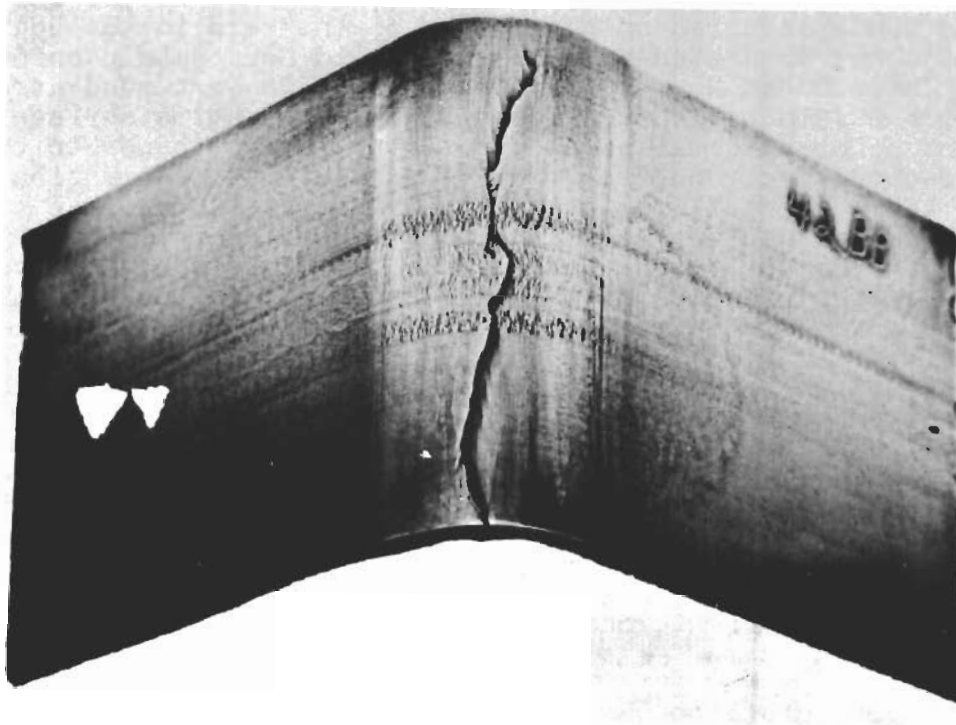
LONGITUDINAL-WELD BEND TEST SPECIMEN
